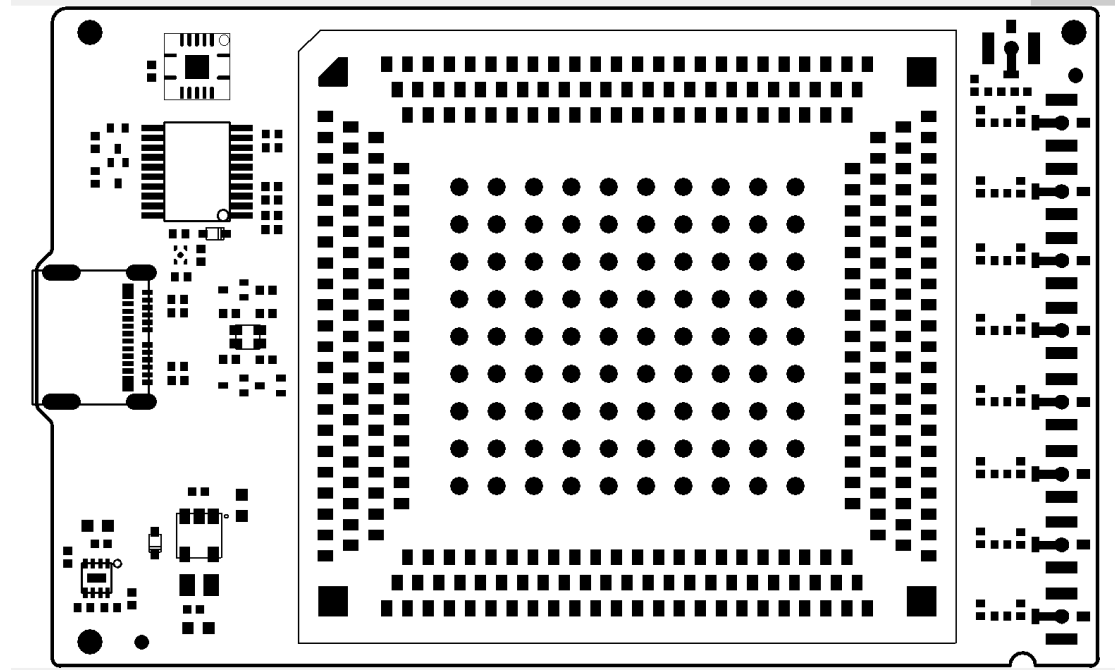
5G S-Module All-in-one Type-L Pin Layout top view
